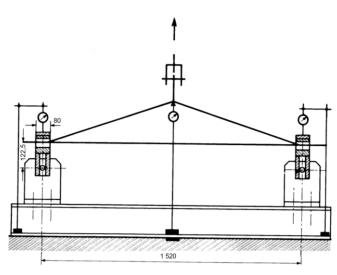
Connections between brake triangles to be tested and test stand for static tests – variant 4 [7]
